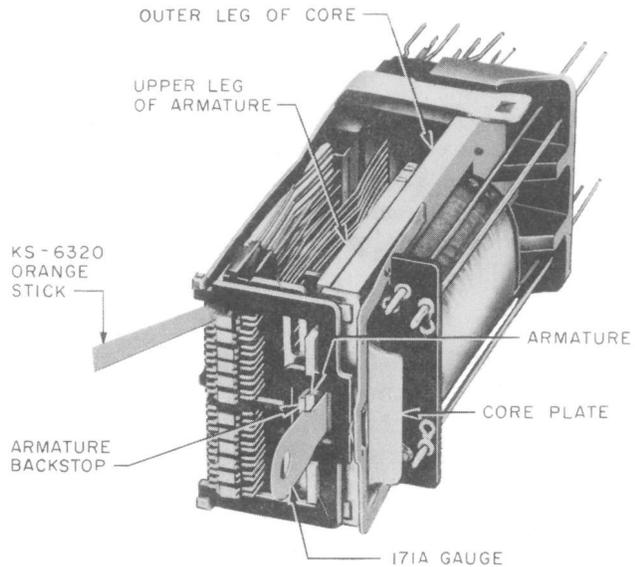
Method of Checking Open or Closed Contacts of AL-Type Relay
